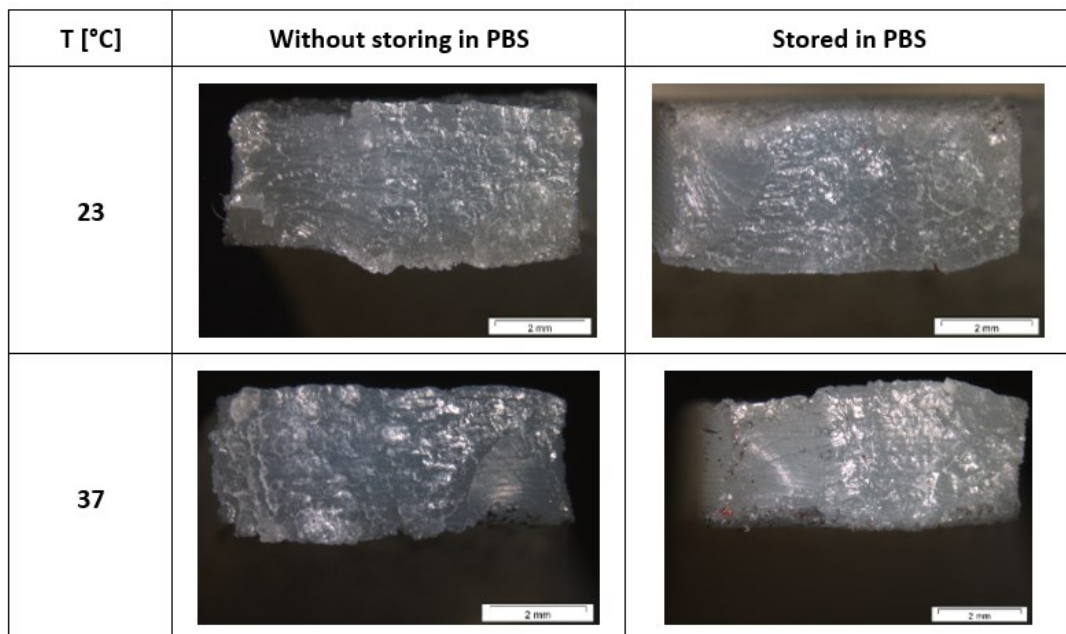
Fracture surfaces of the Bionate® 75D tensile specimens.
